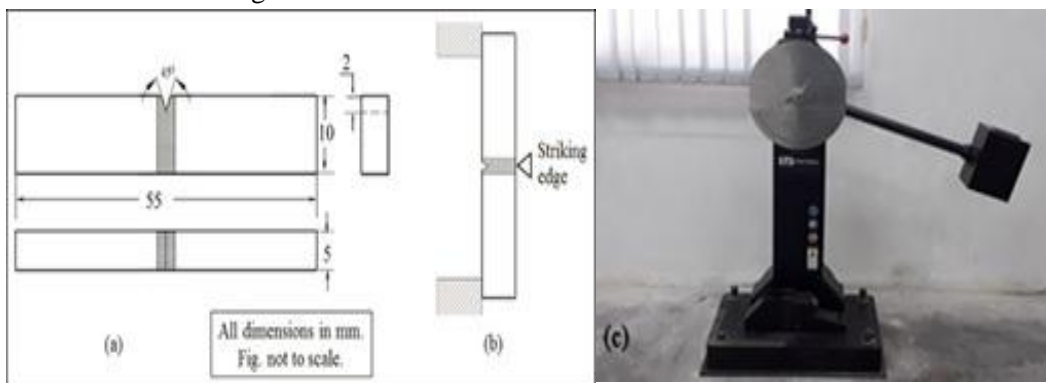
(a) ASTM E23 proportions of Charpy V-notch specimen, (b) Position of specimen during the test, and (c) Impact testing machine.
